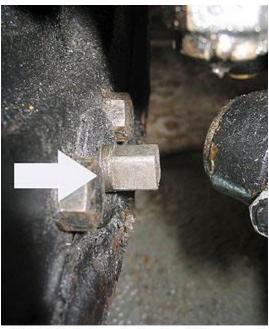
The brake adjuster should be screwed in only a little more than this when the brake has been assembled correctly
